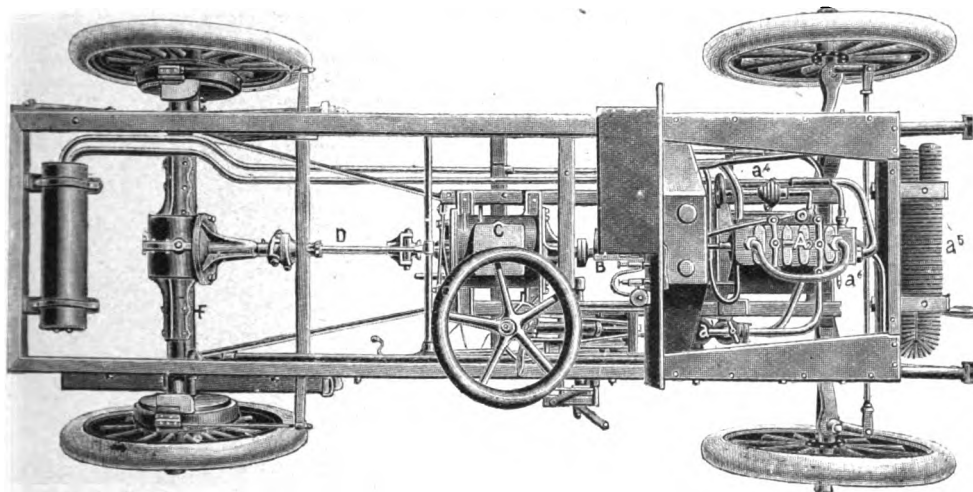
Chassis of Chenard-Walcker 14-h.p. Car.
